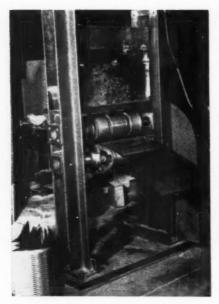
Shown starting through the machine, the outside casing has its edges offset and is formed so that it can be fitted perfectly into its end piece. The operator has pushbutton control of the machine.
